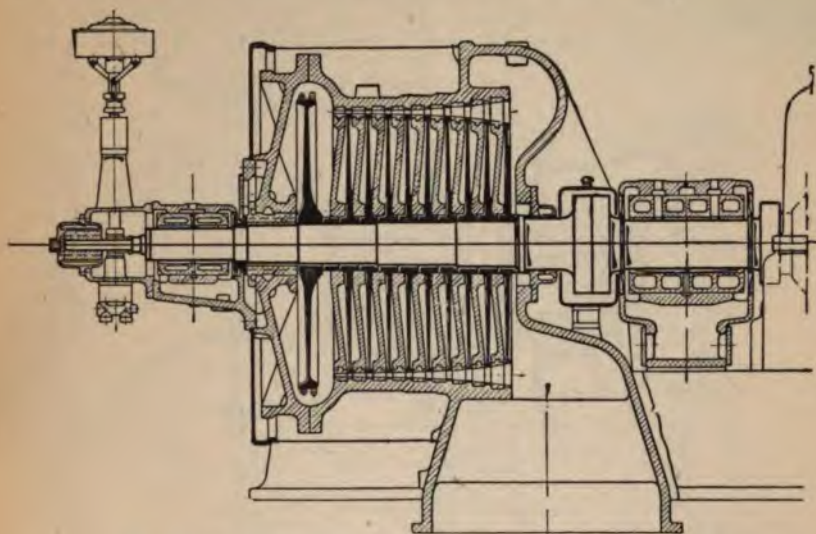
Section of one Form of the A.E.G. Steam Turbine.
